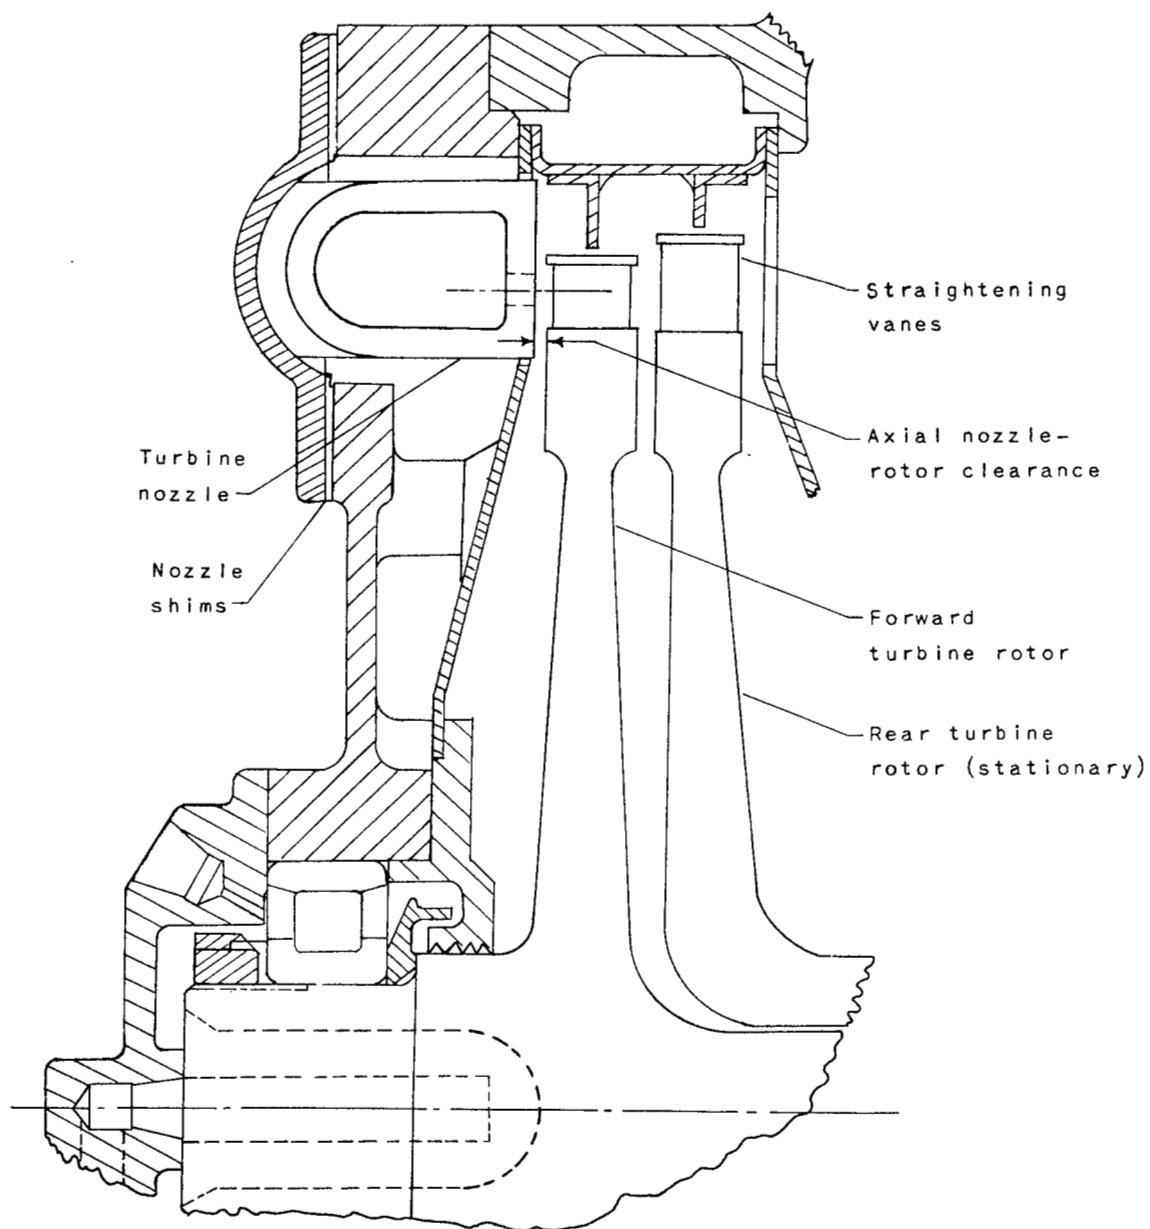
Sketch of nozzle and rotor assembly for Mark 25 torpedo power plant.
